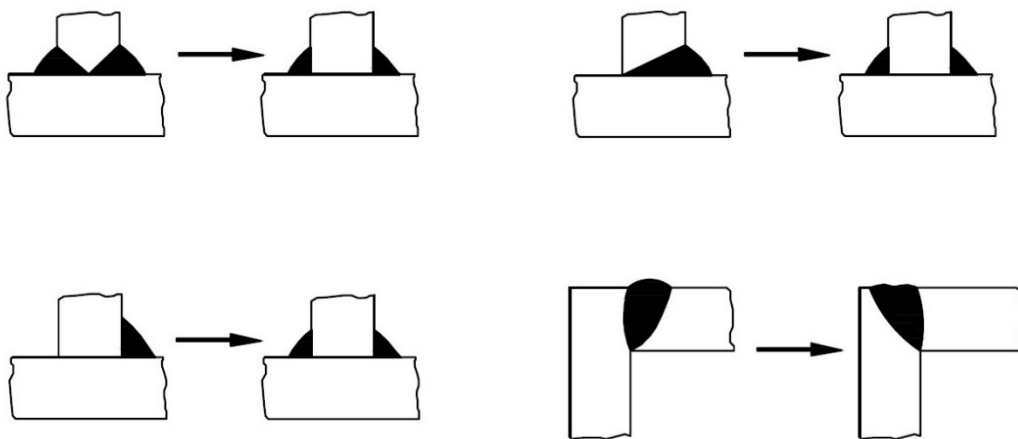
Improved weld details to reduce through thickness stresses.
